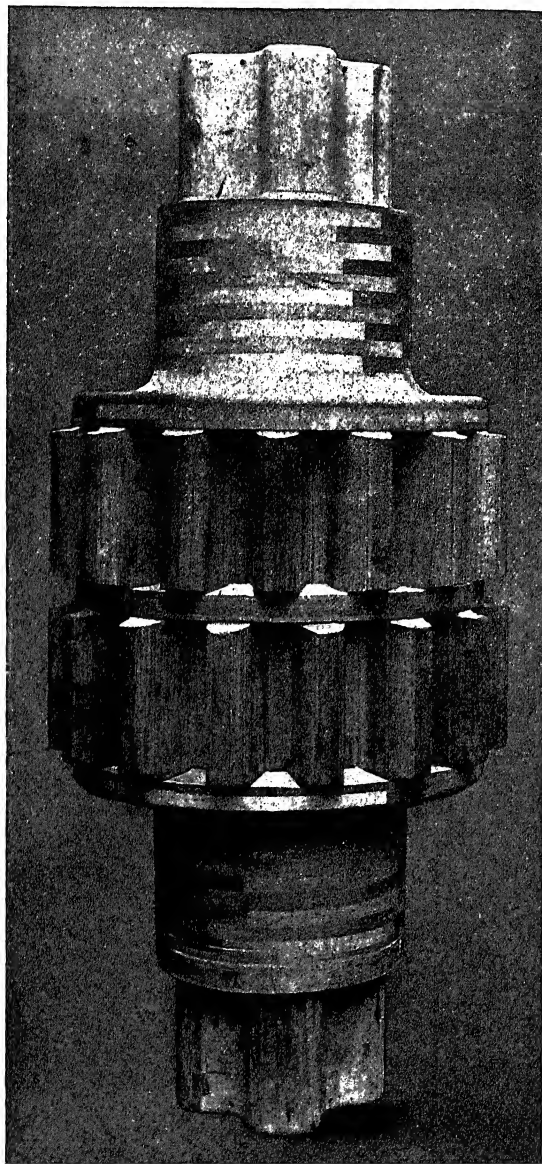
Rolling-mill Pinion, 15 teeth, 7-in. pitch, 26-in. face
